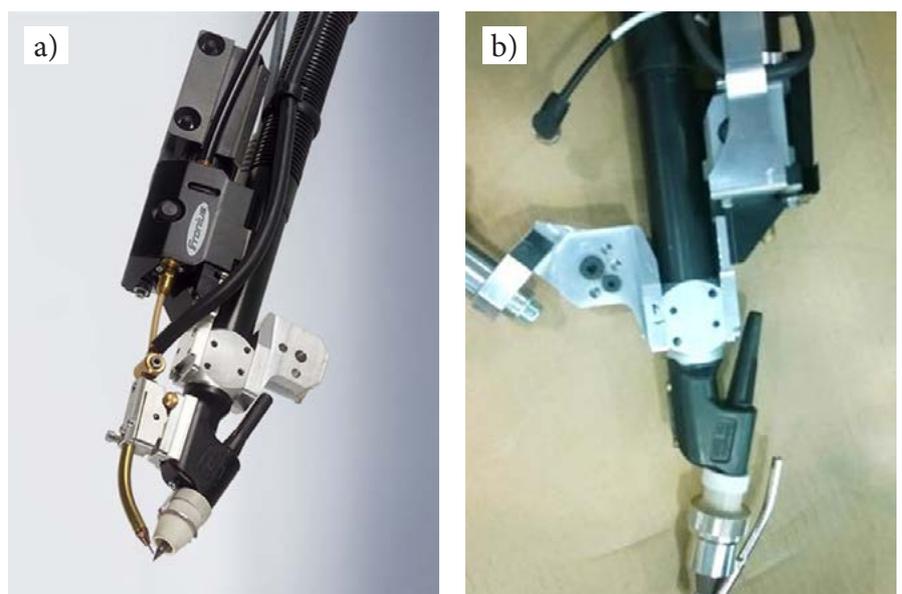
Machine welding torch Robacta TTW4500: a) with the classical, i.e. side wire feeding [7]; b) after replacing the typical wire feeding unit with the unit incorporating a nozzle with a TOPTIG type wire feeding conduit
